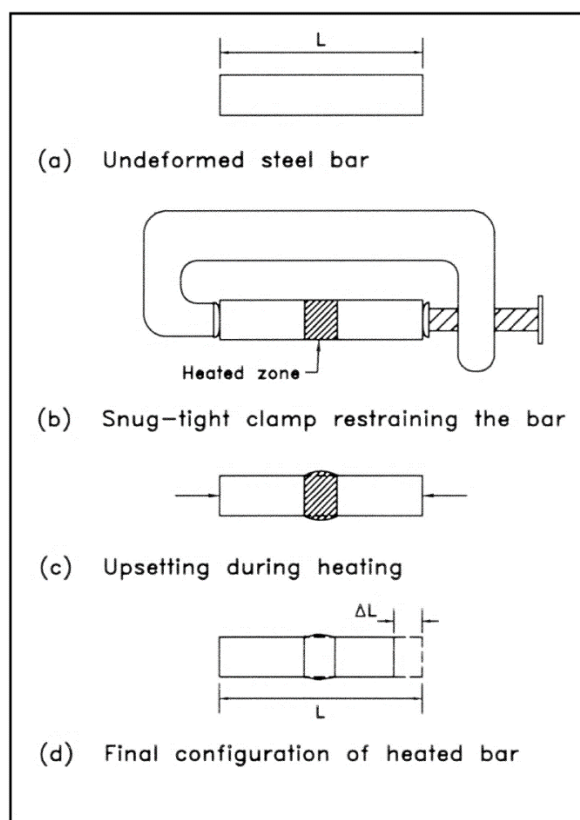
Conceptual Example of Shortening a Steel Bar (FHWA, 2008)
